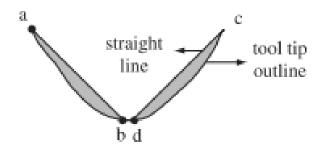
DEFROL method used in detecting the edges of the tool.
